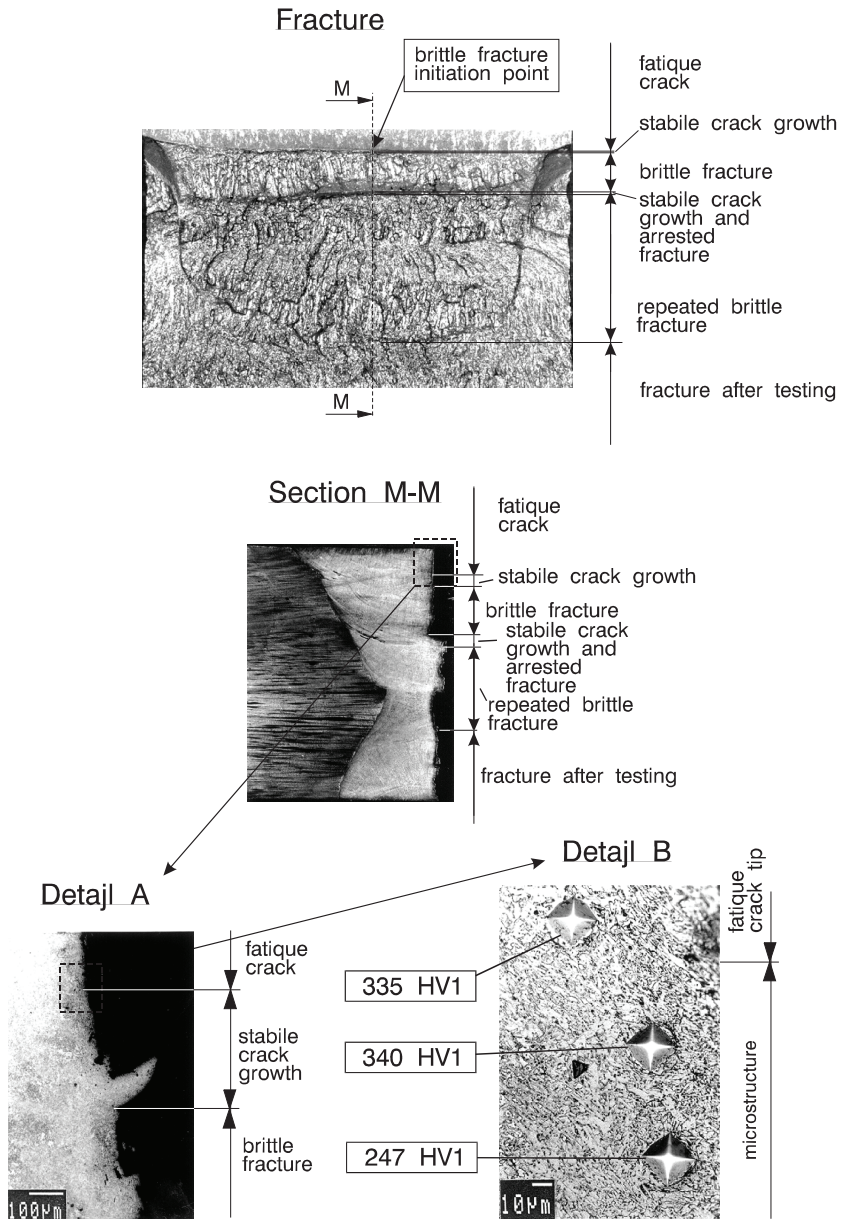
Soft root layer CTOD fracture toughness of heterogeneous undermatched weld joints, [1].
